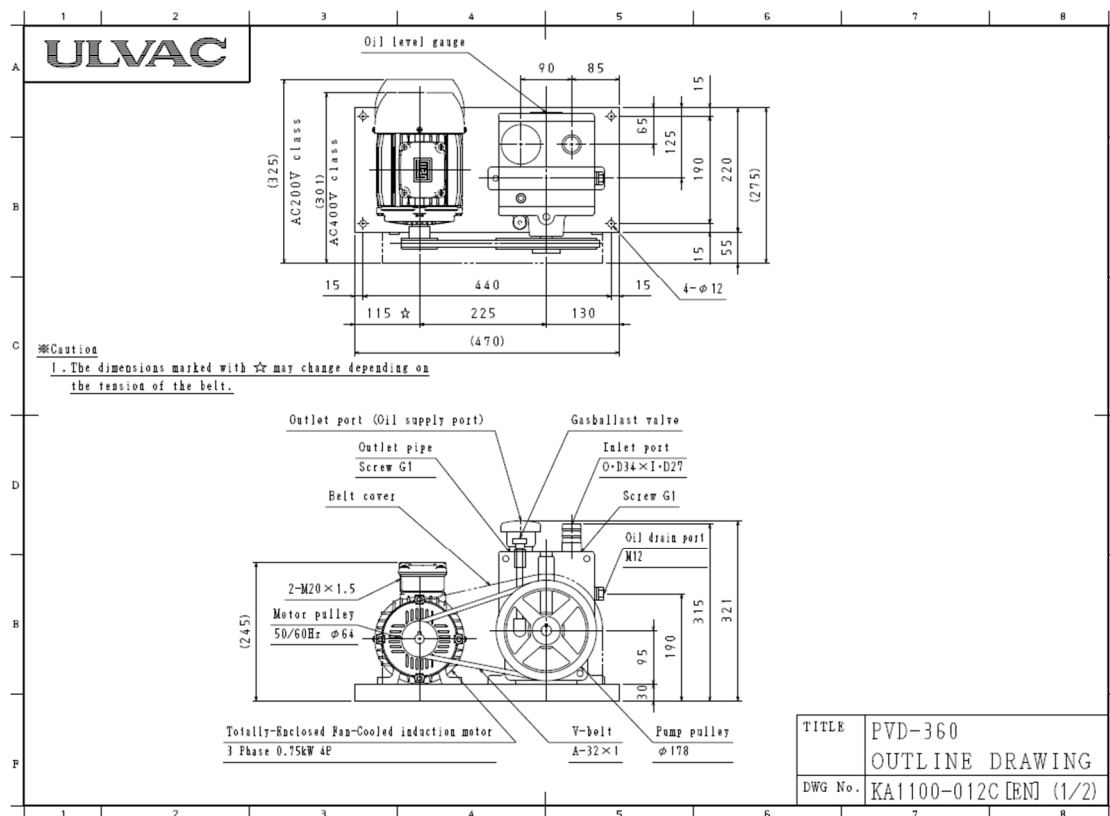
Dimensional drawing PVD-360, PVD-360K
